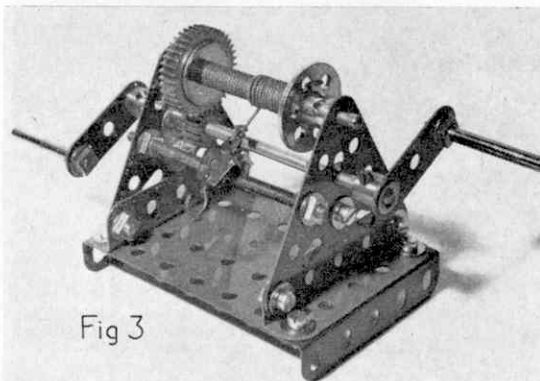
Two-handed donkey winch. Note non-standard spacing of gears making use of the slotted holes in the triangular side plates.
